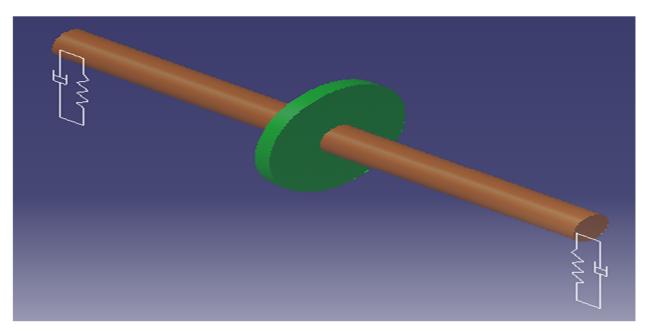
Isometric view of a model of rotor-shaft system with bearings
